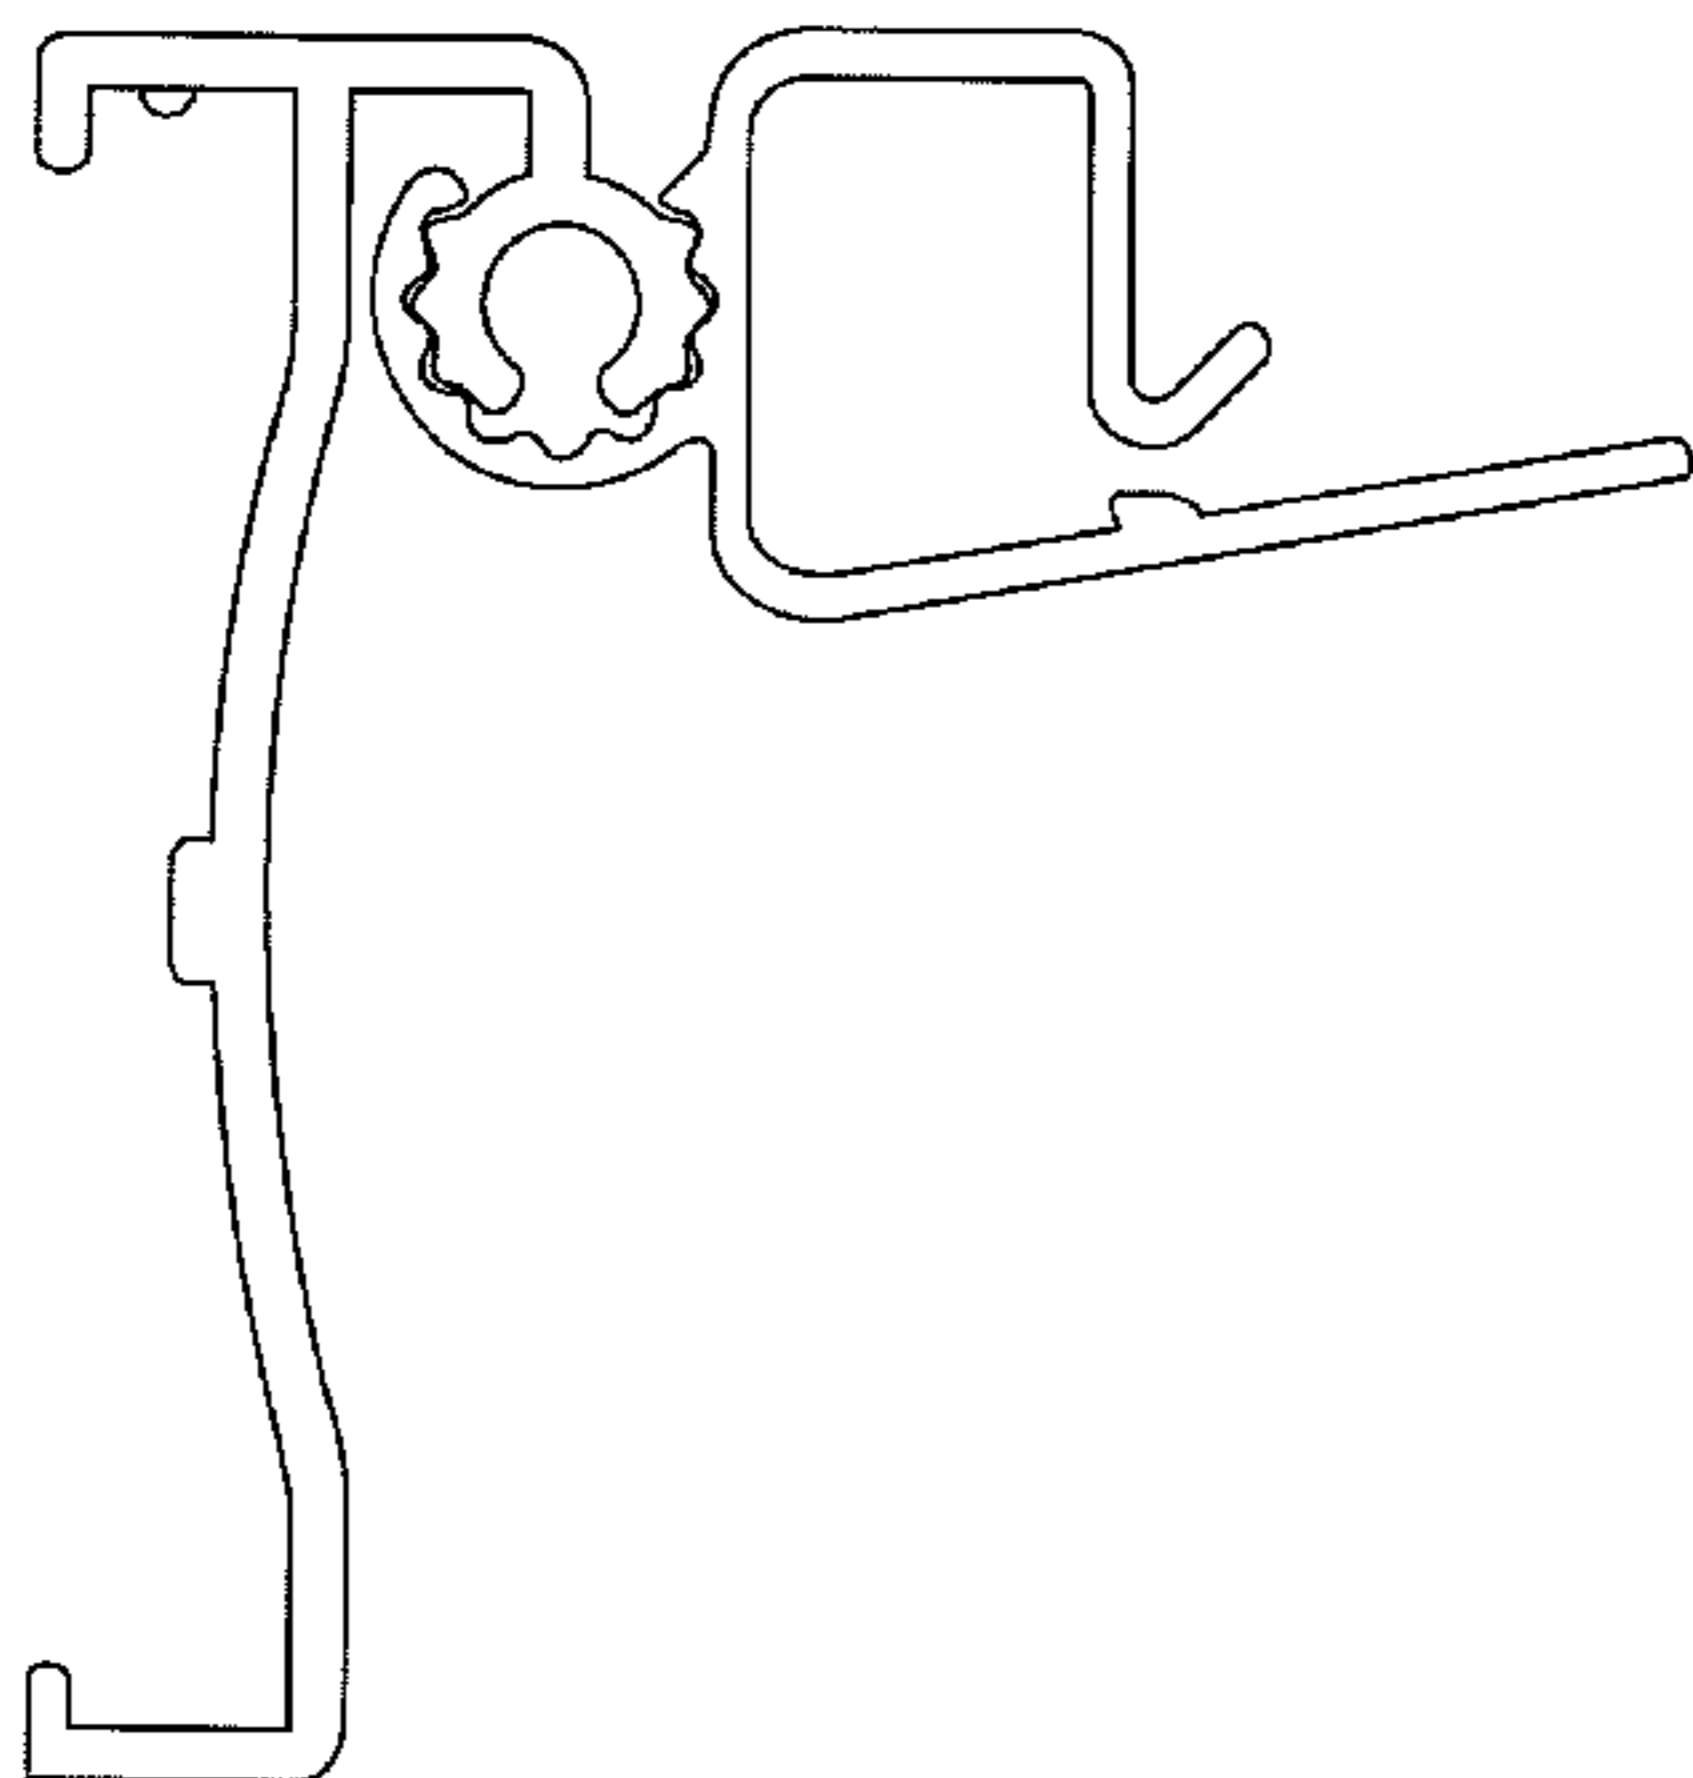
is a rear elevation view of the holder extrusion of FIG. 11;
